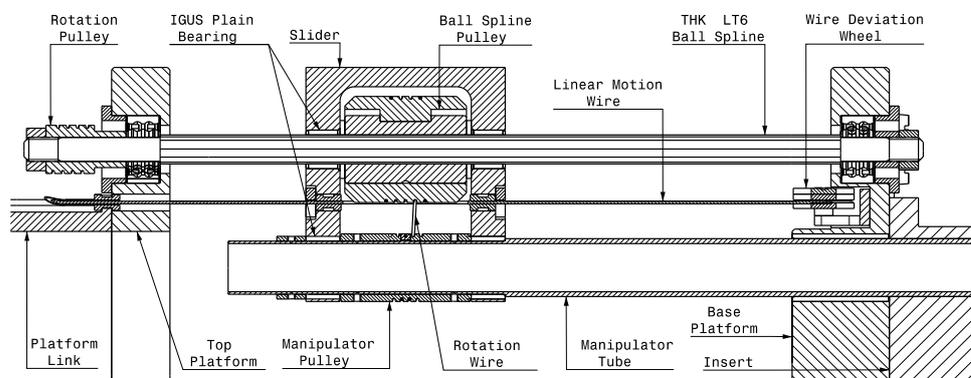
Sectional view of the linear and rotary actuation mechanism of one manipulator.
